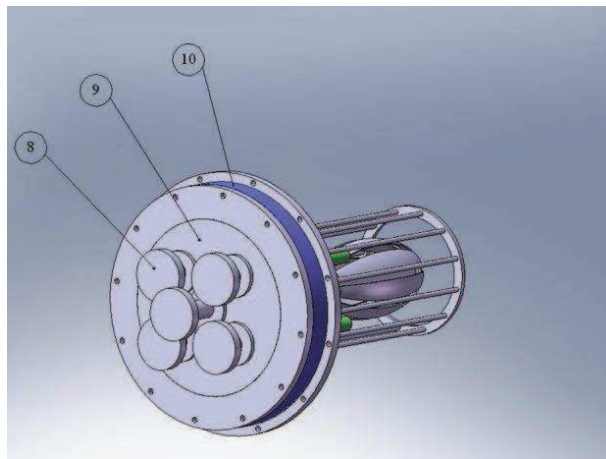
Rear view drawing of the QSPA –SLIDE plasma source. 8- electro-magnetic coils of the gas valves, 9- the cathode flange, 10- the face plate insulator.
